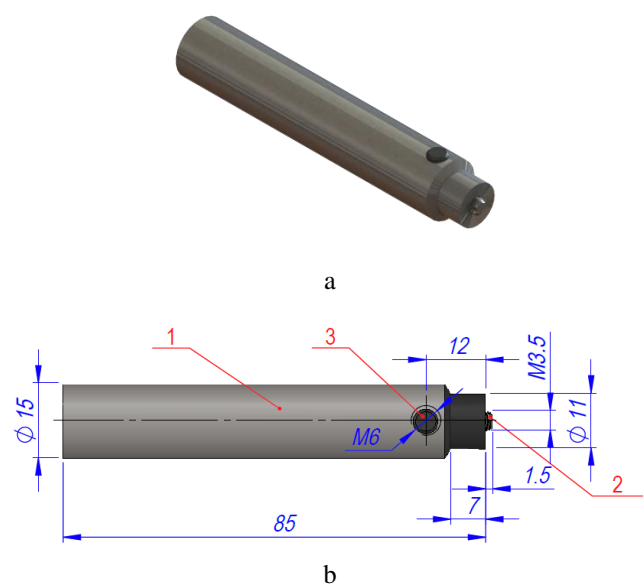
Three-dimension view of the FSSW tool (a) and its dimensions (b): 1 - shoulder; 2 - pin; 3 - screw for fixing pin in the shoulder
